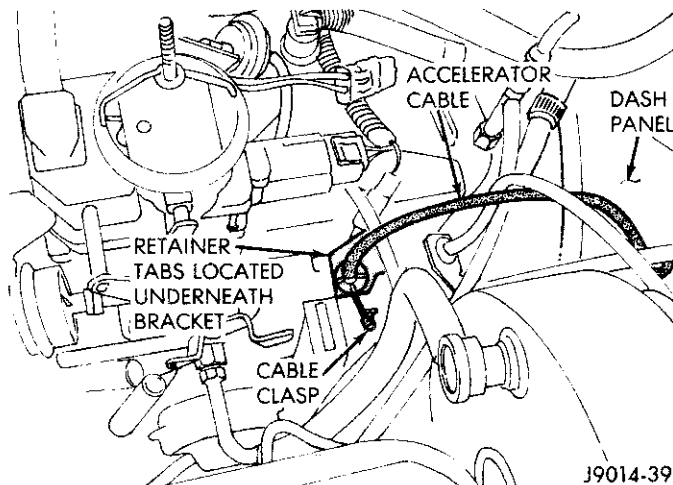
Accelerator cable Remove/Install—MJ/XJ Vehicles with 4.0L Engine
